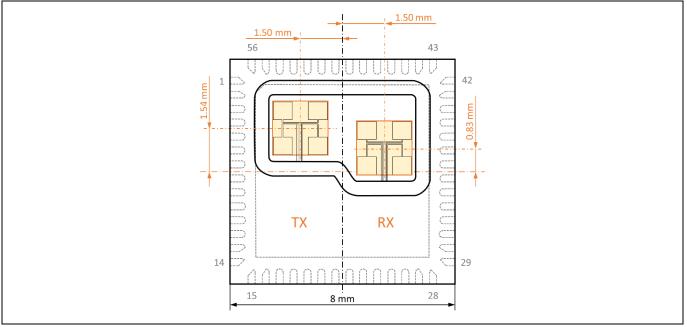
Outline Dimensions of QFN56, 0.5 mm Pitch, 8 mm × 8 mm
